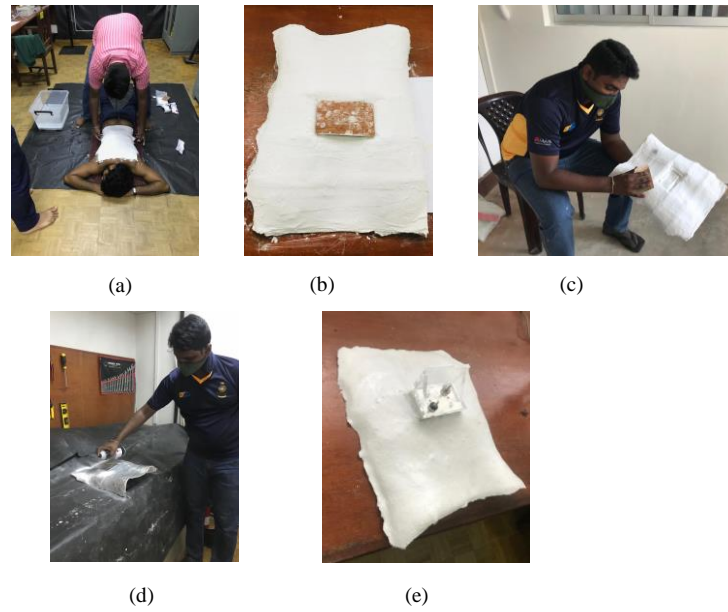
Steps of the fabrication of the back brace: (a) Mould (b) Fabricated plast-of-paris mould (c) Smoothing the mould surface (d) Painting the mould surface (e) Fabricated back brace
